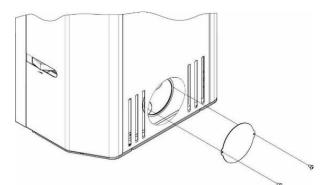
Connection of the DEFRO HOME IGNIS stove to the external air inlet.
